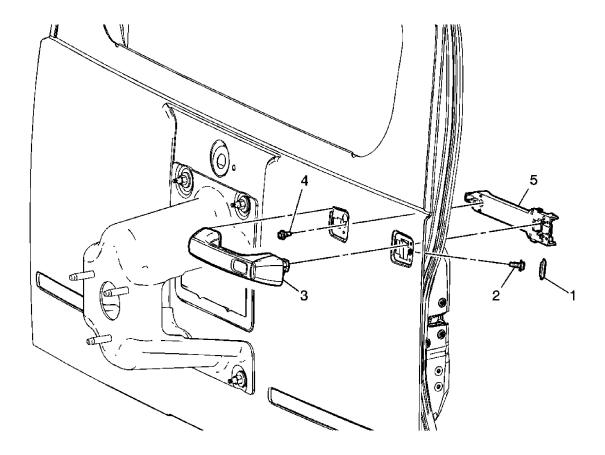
Handle Replacement - Endgate Courtesy of GENERAL MOTORS CORP.
